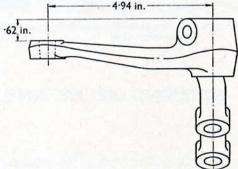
Steering relay and connecting rod lever checking dimensions
